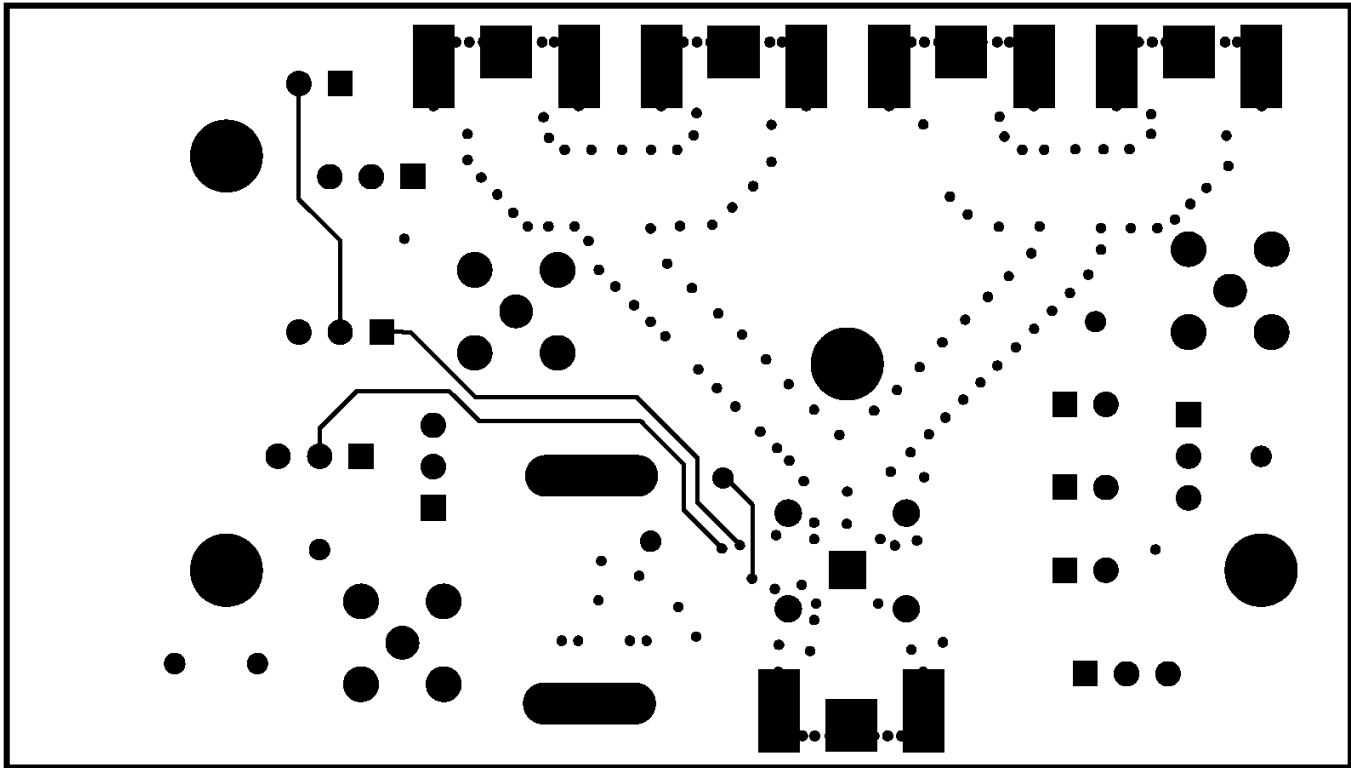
MAX3941 EV Kit PC Board Layout—Solder Side
